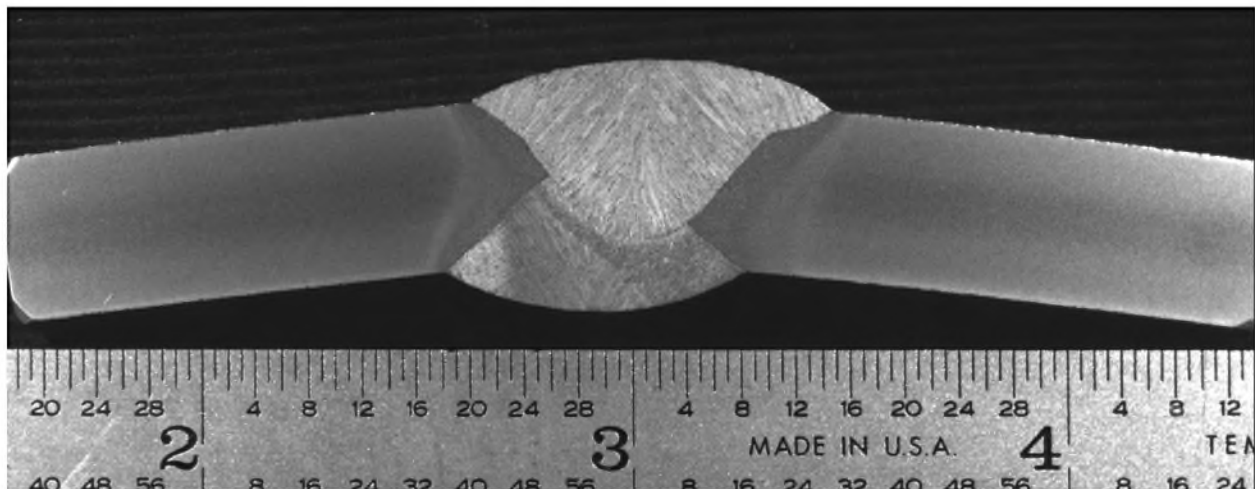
Model 2 - cross-section of seam weld through intact section of failed joint
